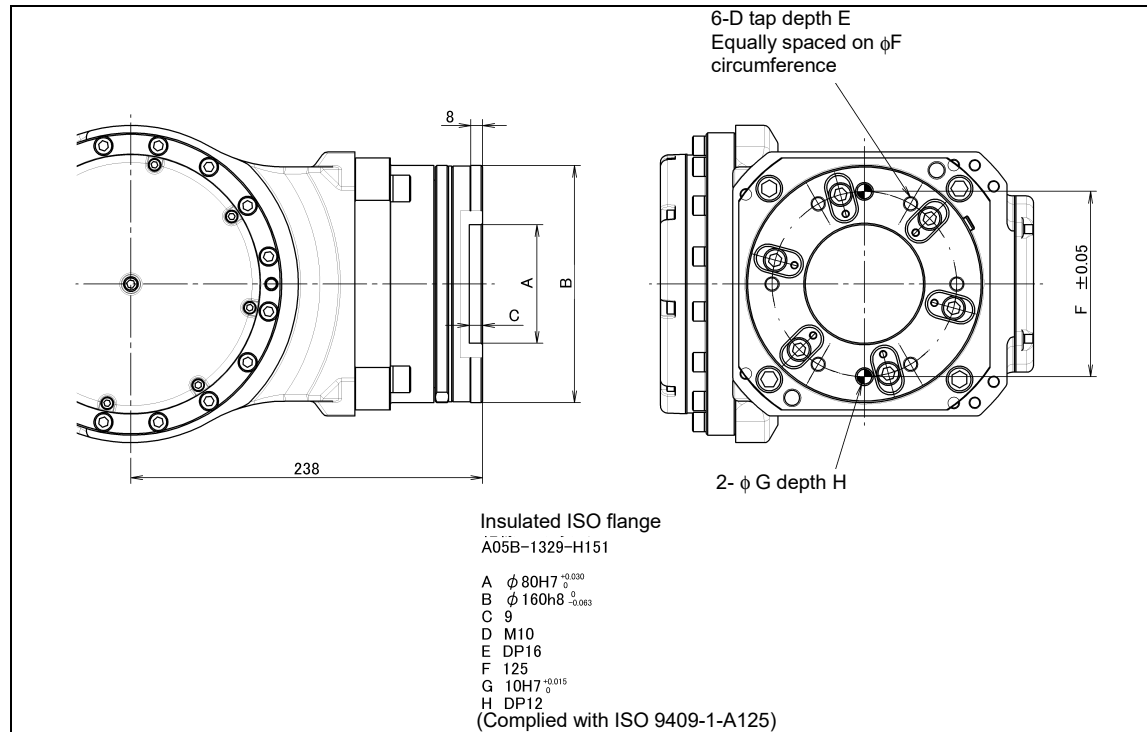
(c) End effector mounting face (Insulated ISO flange) (R-2000iB/165F/165R/170CF/125L/150U)
